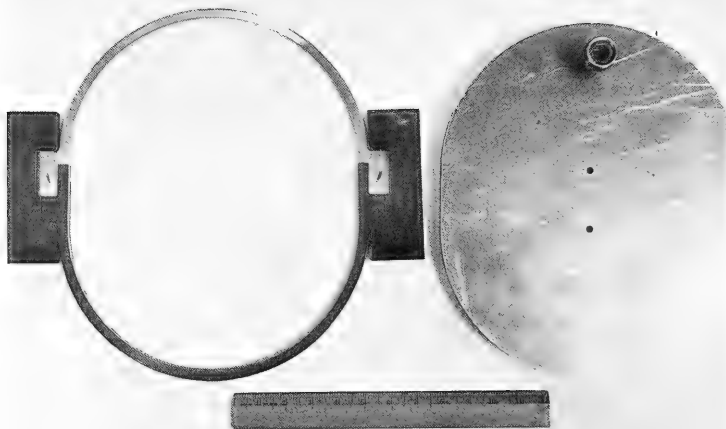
Two-dimensional model of end closures and hydraulic load applicator.
